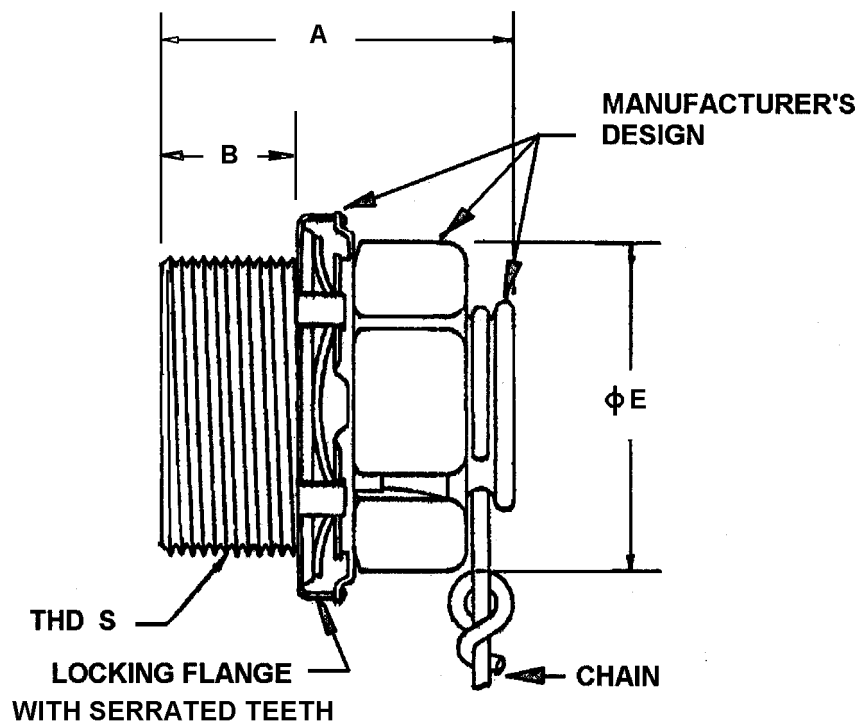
Coupling plug, dimensions, and configuration, style 1.
